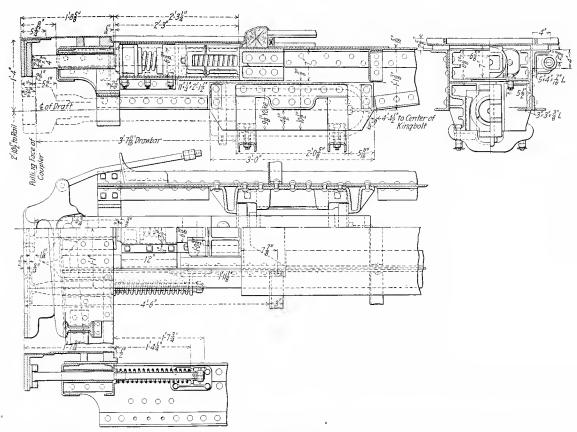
Miner Friction Draft Gear and Friction Buffer for Lehigh Valley Passenger Train Cars. W. H. Miner.
